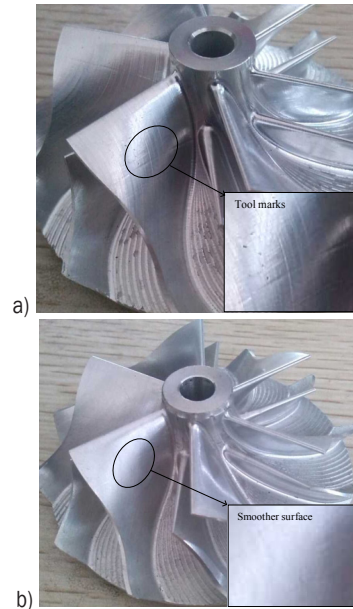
Comparison of the impellers machining quality using two methods; a) the impeller machining quality in direct G^1 block machining method; and b) the impeller machining quality in proposed algorithm
